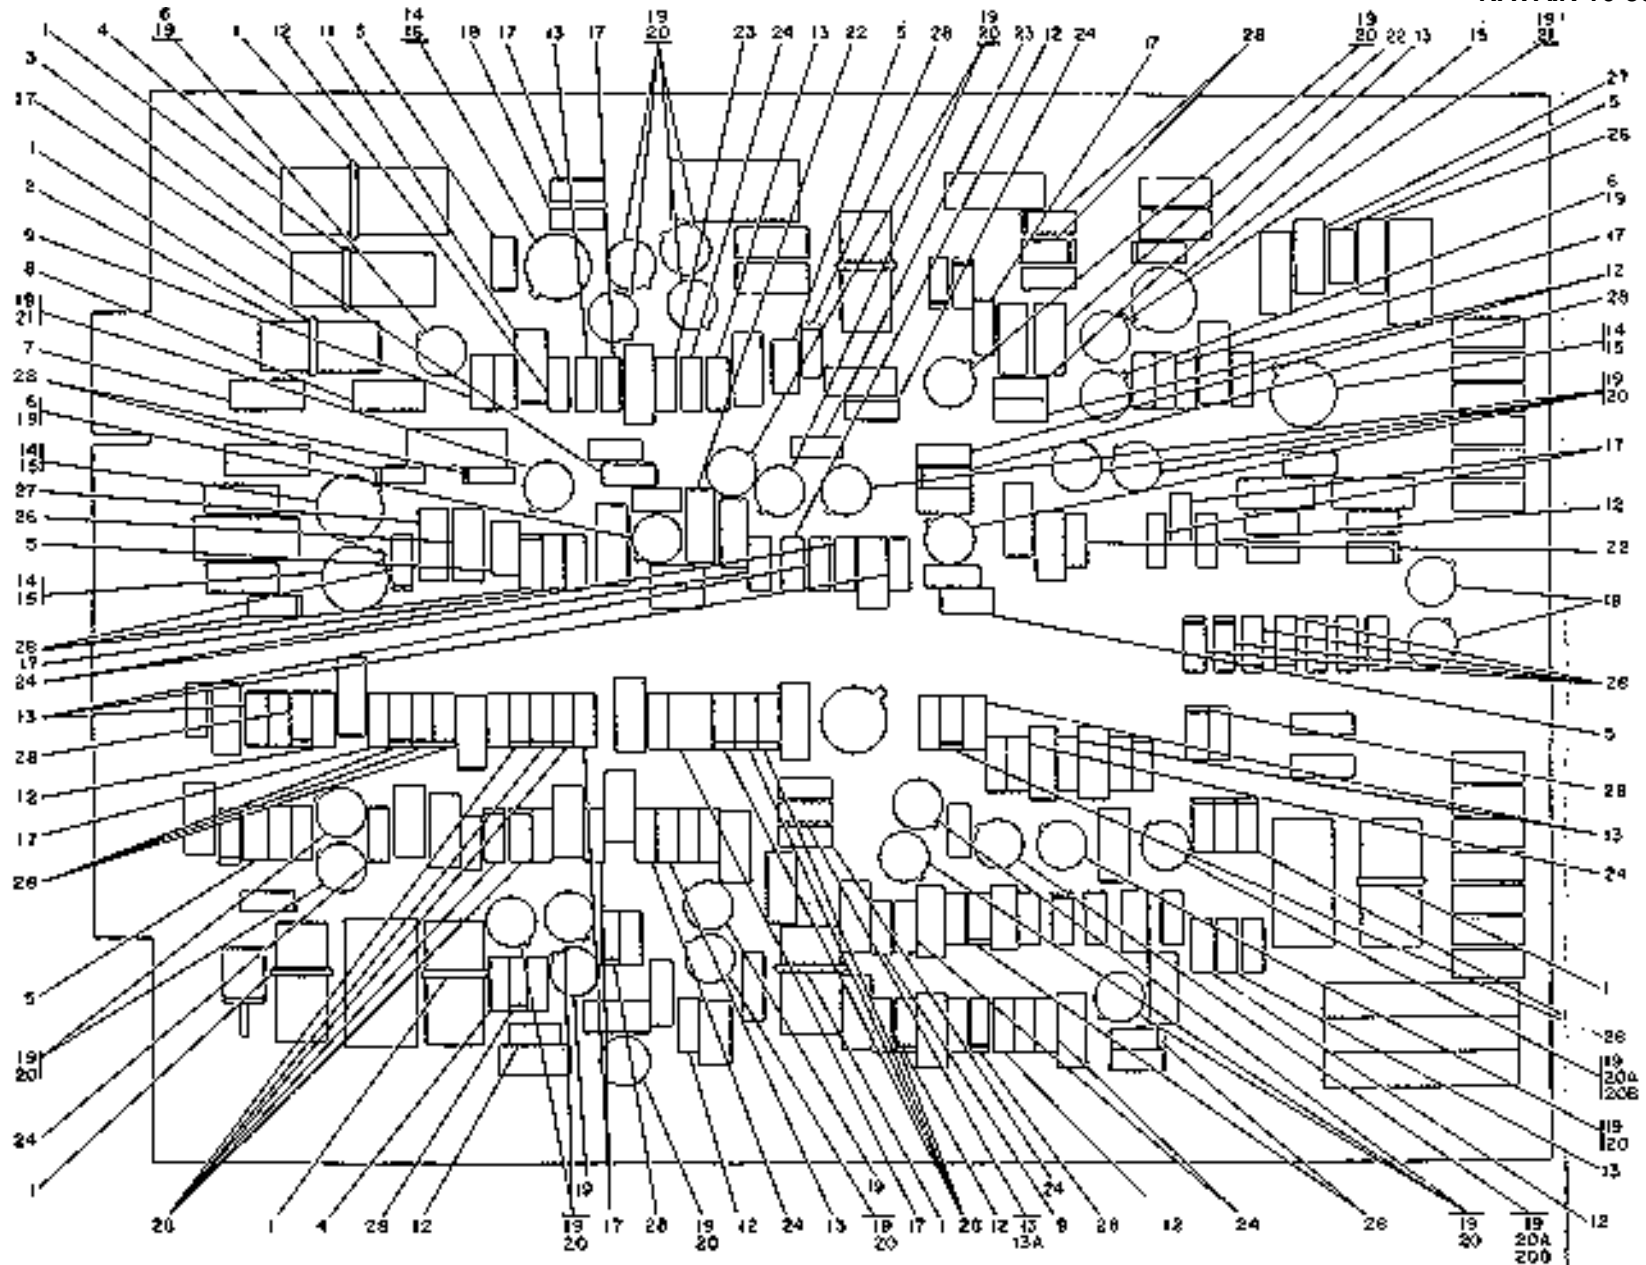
Circuit Card Assembly Logic No. 2 (Sheet 1 of 2)
